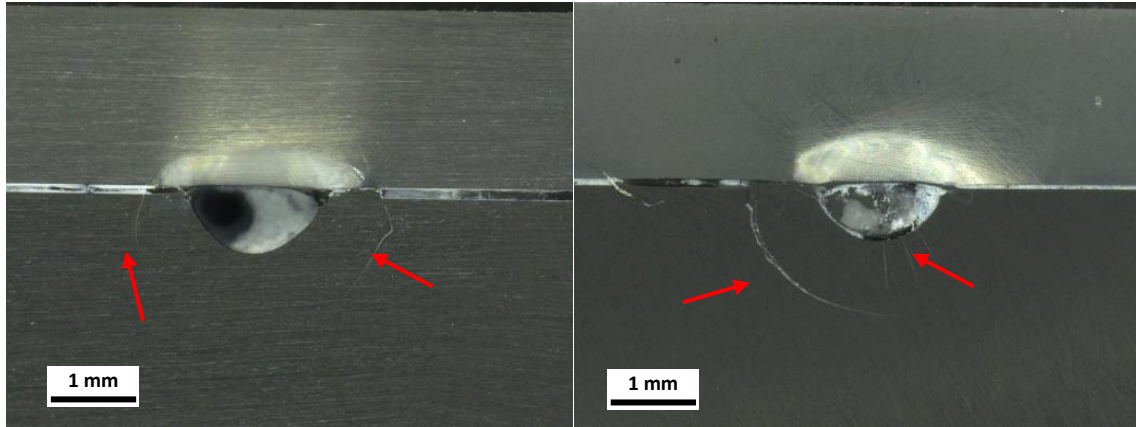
Cracks in the absorbent material observed for the 70/200 weld
